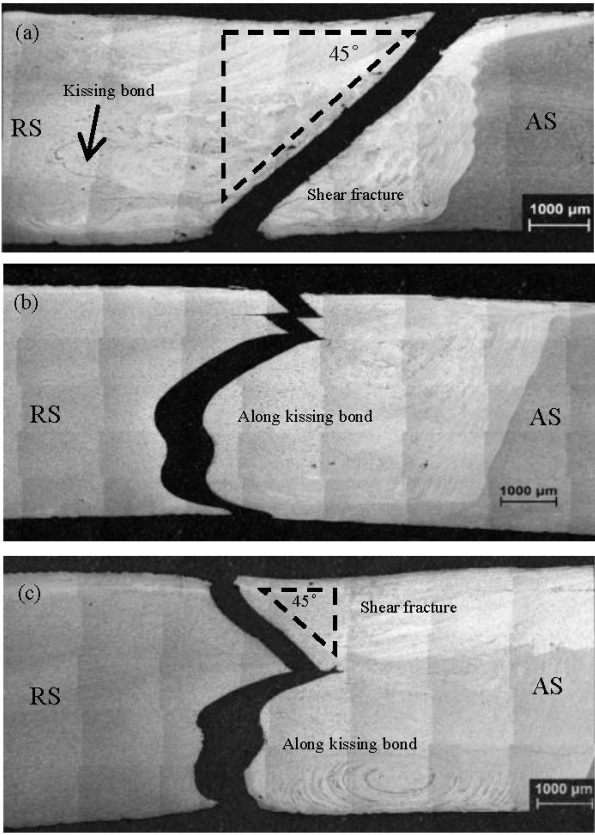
Macrostructure profiles of the fracture of AA5083-H112 FSW joints.
